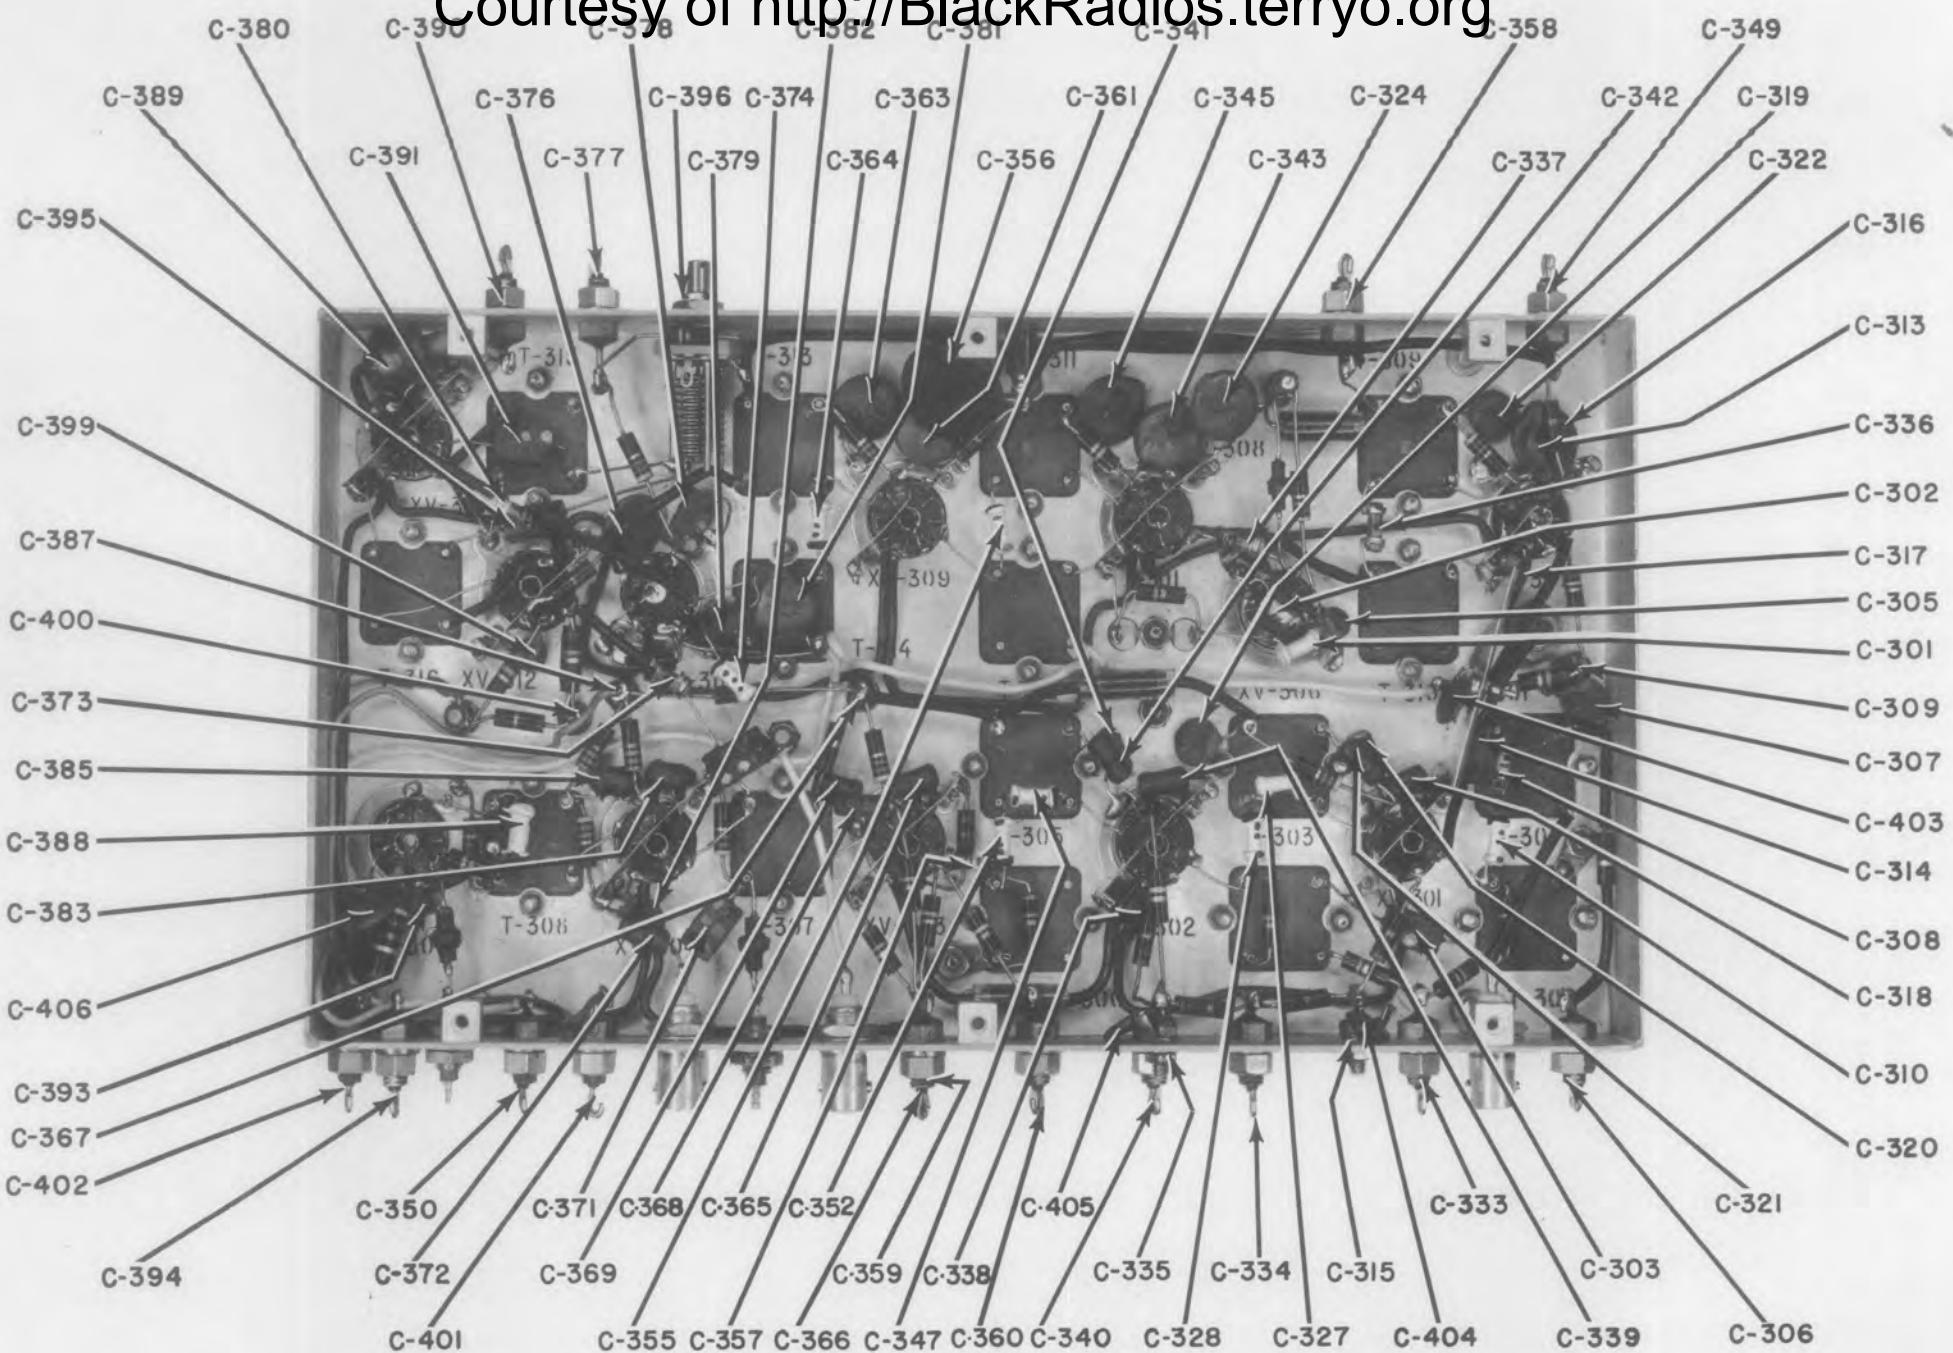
IF Strip, Model G-11OB Receiver, Bottom View (Dust Cover Removed)
